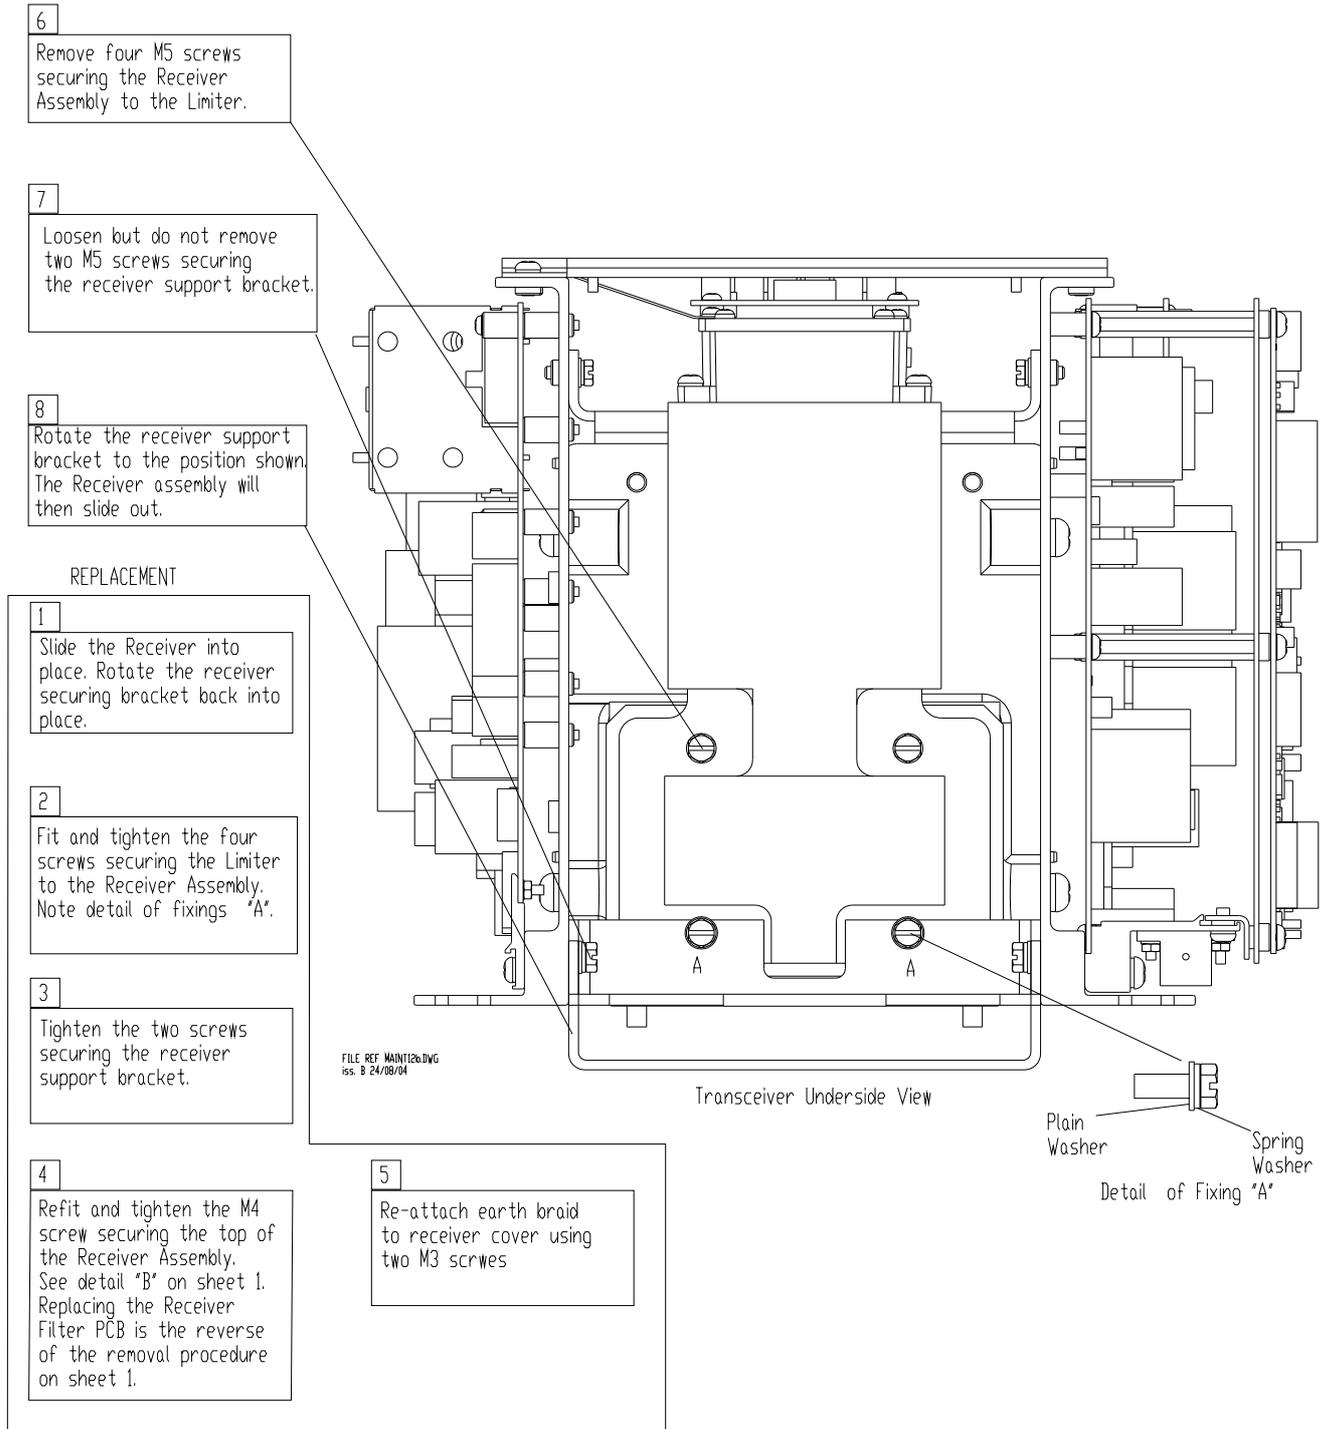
(Sheet 2 of 2) – Replacement of Receiver Assembly 65830616
